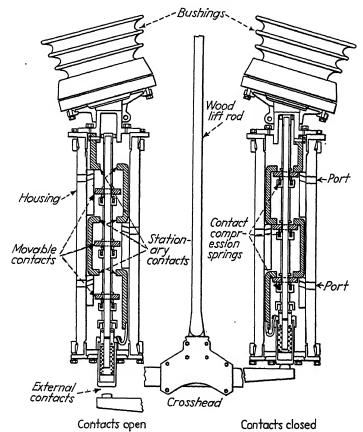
Cross section of General Electric six-break, single-port interrupters for 230-kv. oil circuit breaker.
